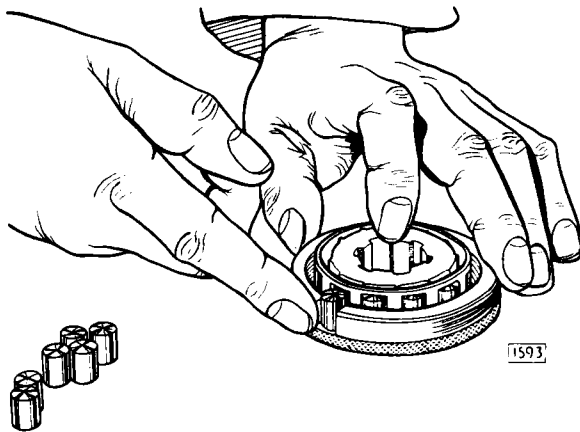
Assembling the uni-directional clutch using Tool No. L.178
